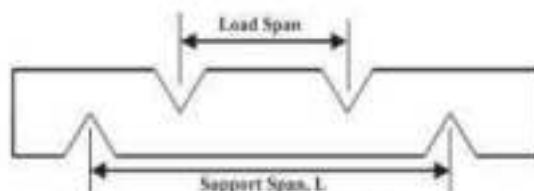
Fixture Used to Align Loading Noses and Supports
